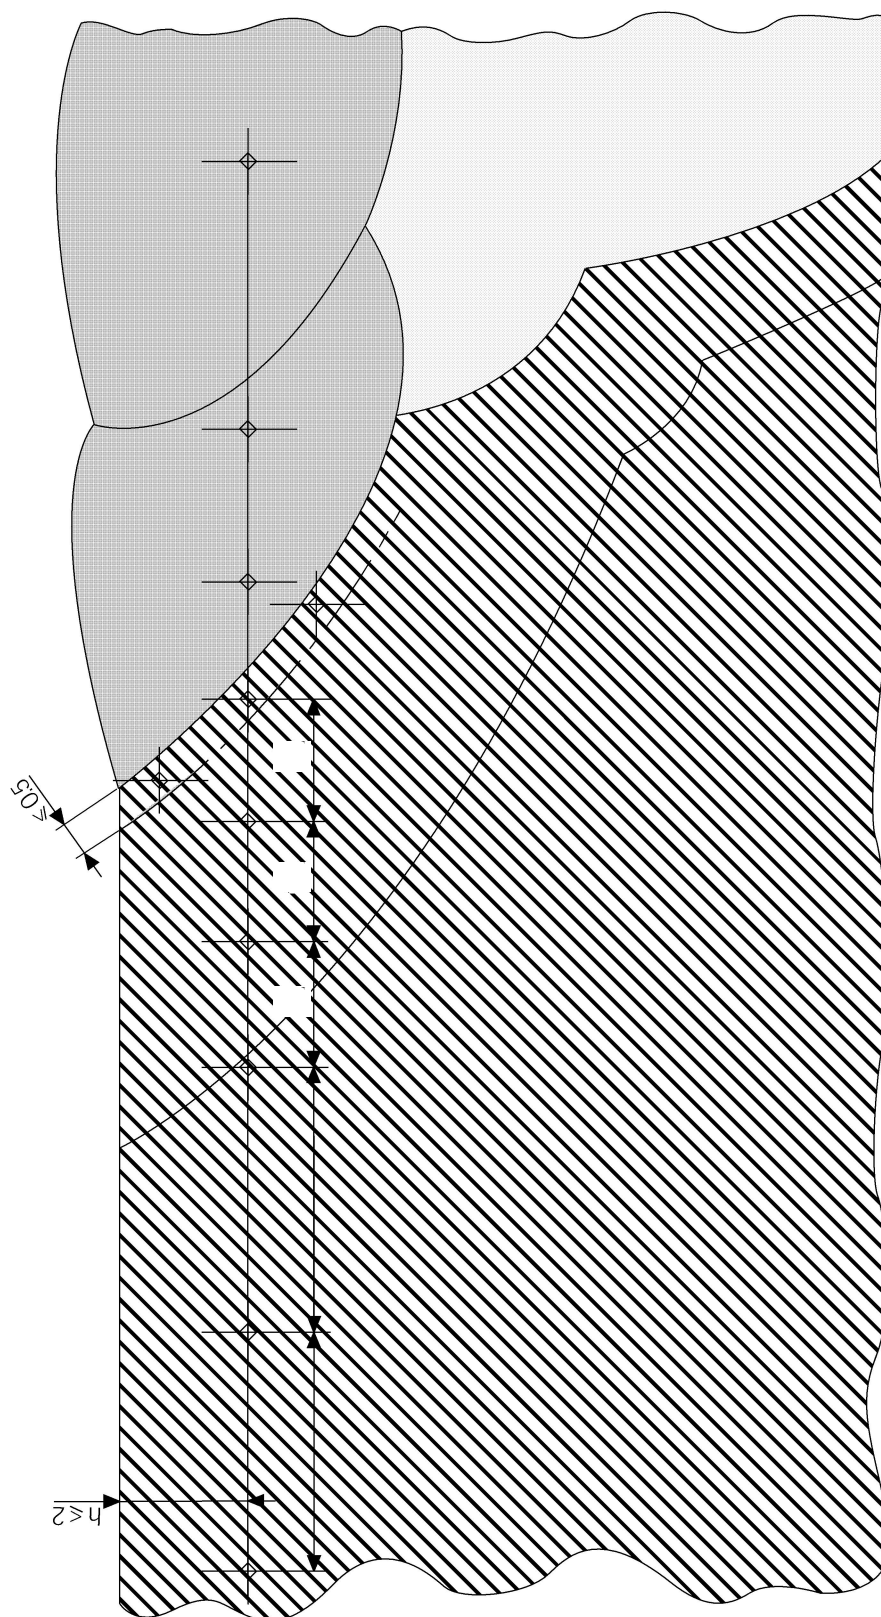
Example showing the position of the indentations for hardness test in the weld metal, the heat affected zone and the base metal of a butt weld (dimensions in mm)
